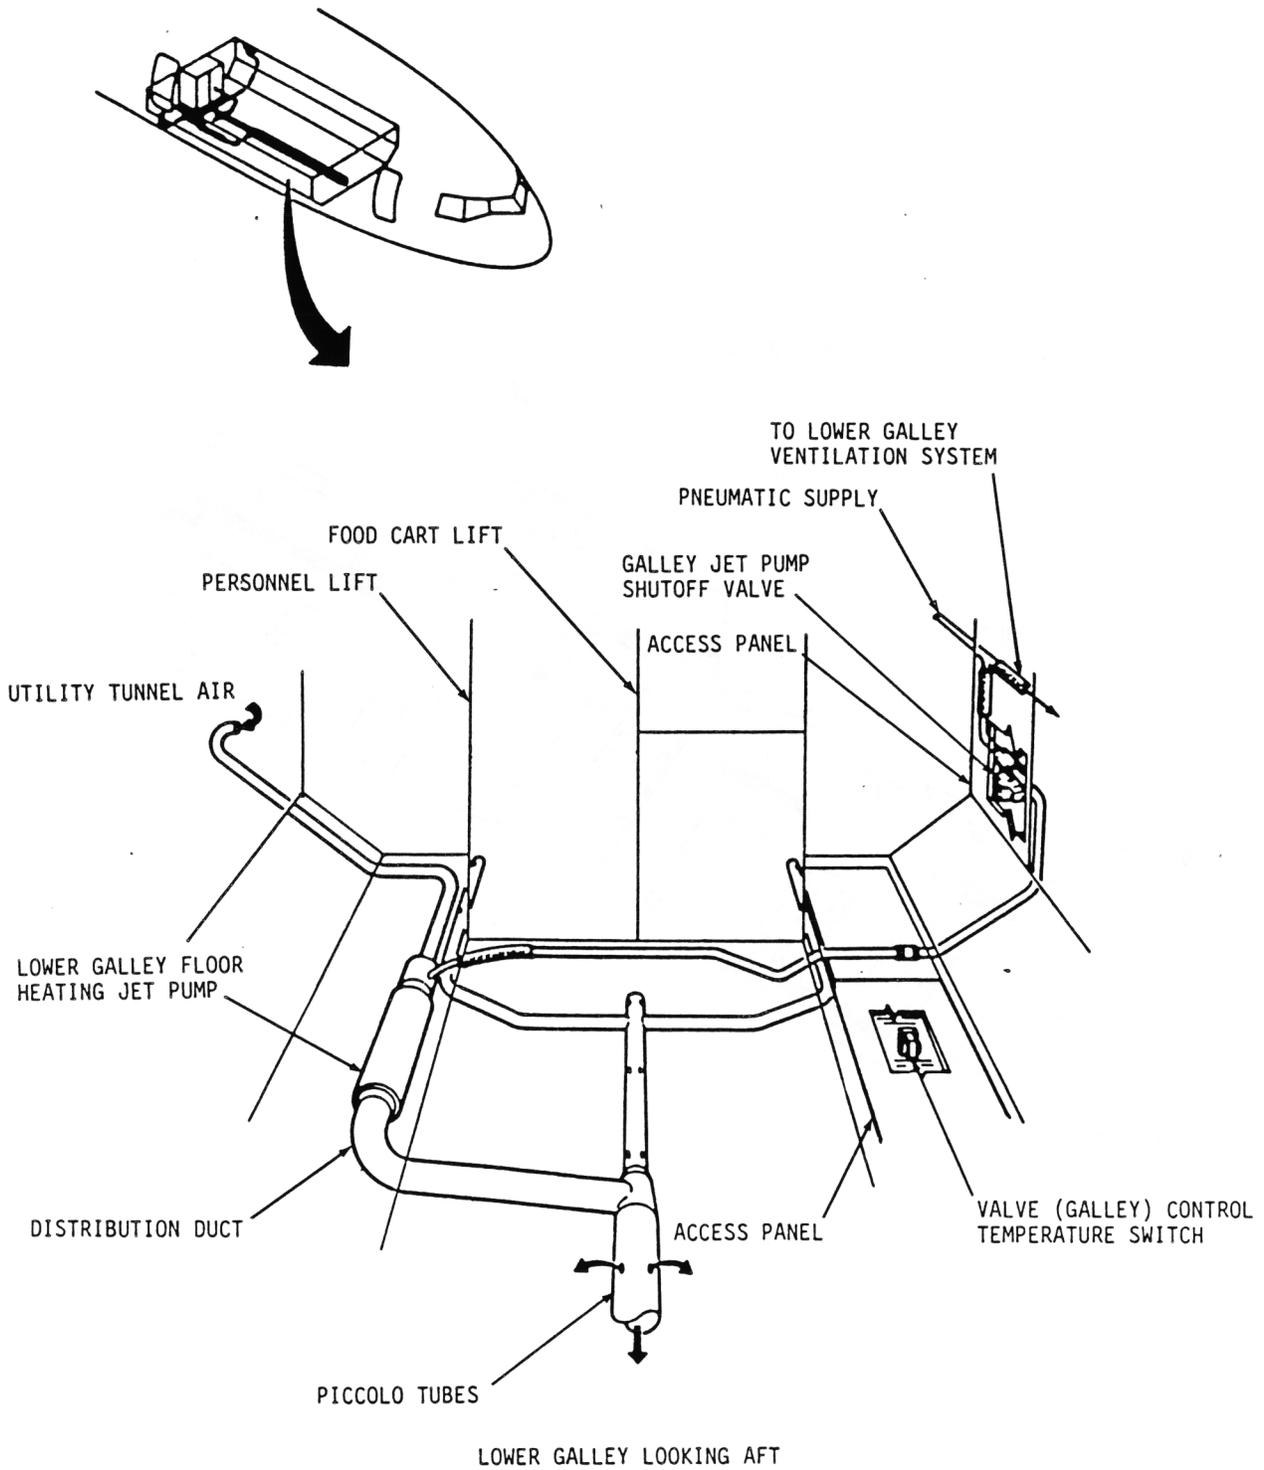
DC-10 LOWER GALLEY FLOOR HEATING
